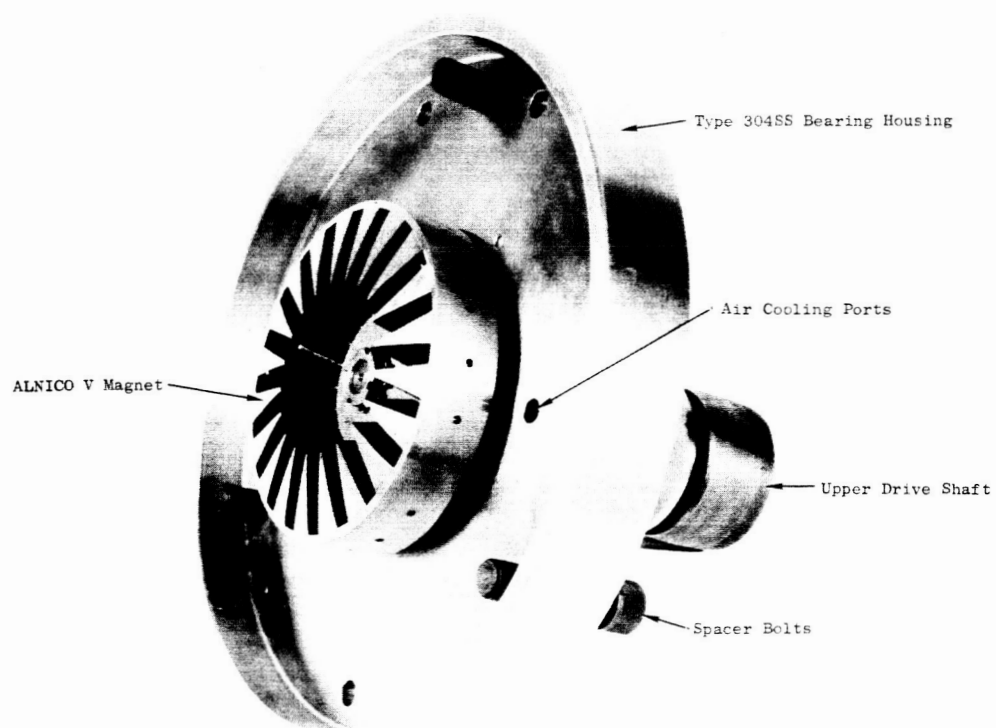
Upper Drive Shaft Assembly for High Vacuum Friction and Wear Tester.
